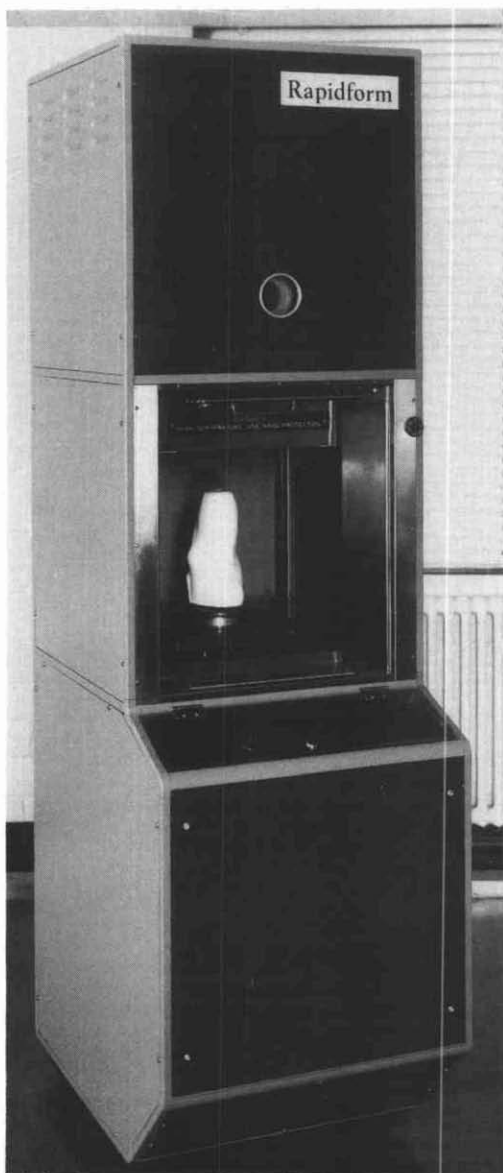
The Rapidform prosthetic socket manufacturing machine.
